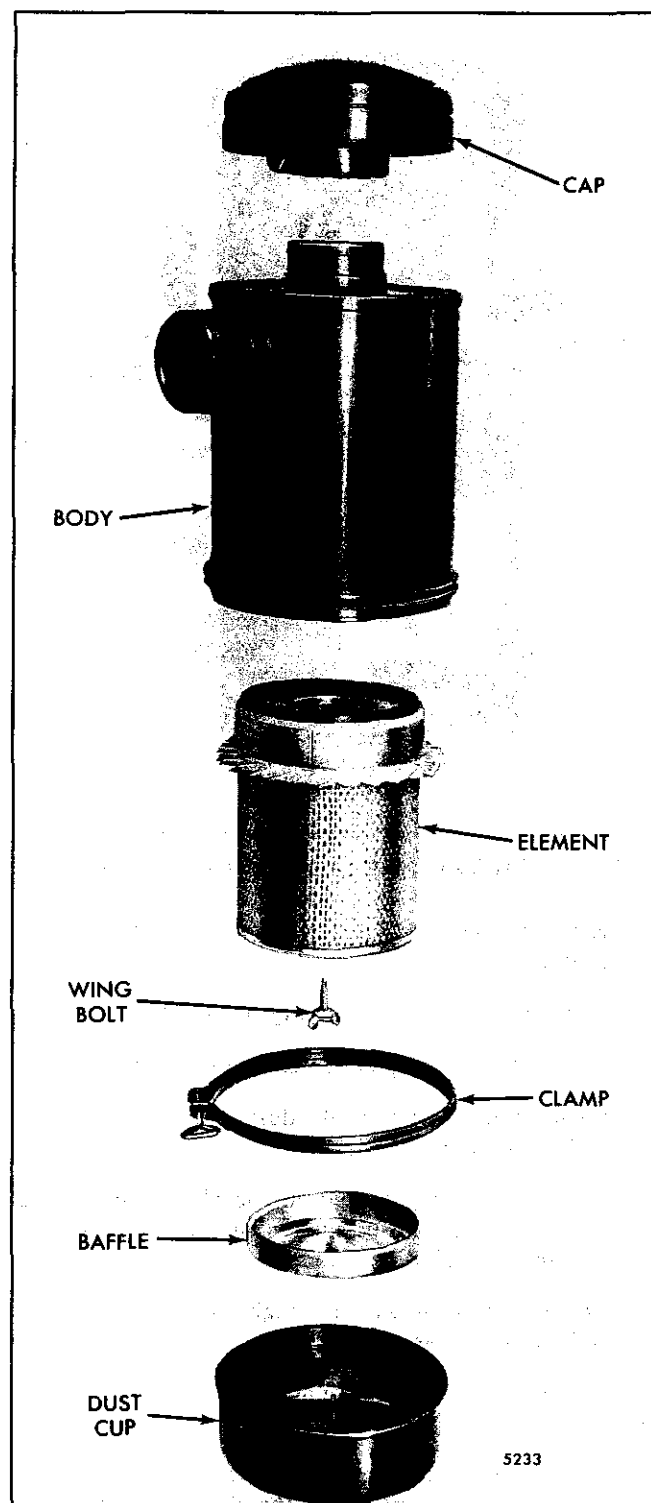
Dry Type Air Cleaner (Heavy Duty)
